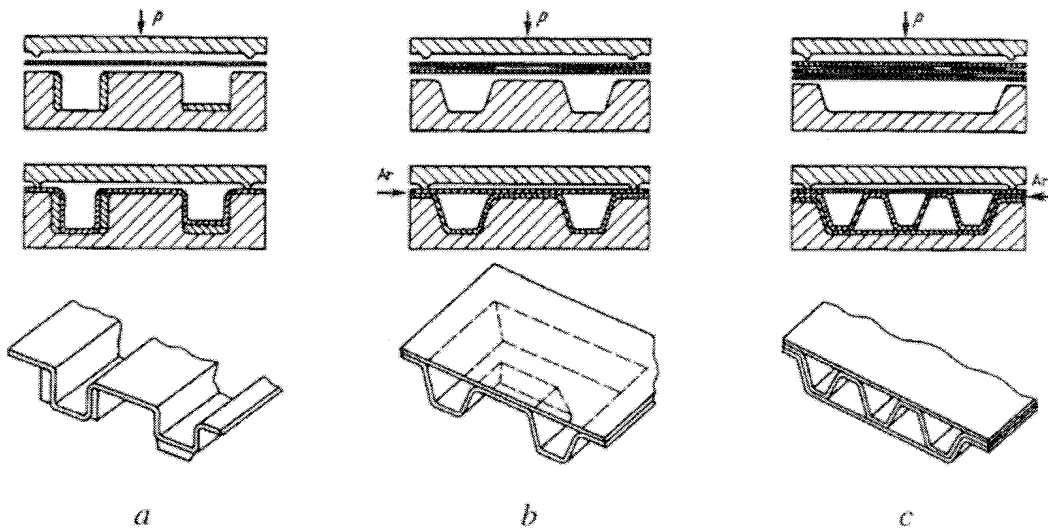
Main schemes used in SPD-DW<sup>1</sup>: a) formation of a sheet with the attachment of stiffening ribs by welding, b) fabrication of a ribbed-type structure, c) fabrication of a three layer structure <sup>(72)</sup>
